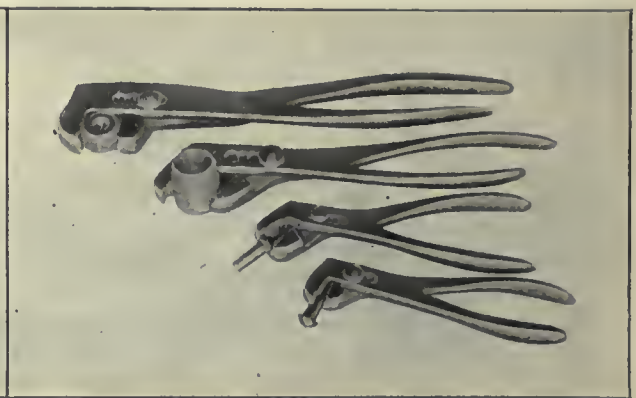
METHODS OF GRIPPING WITH CLAW WRENCH
